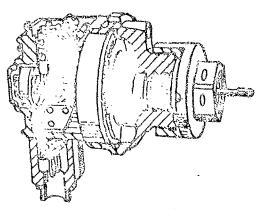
D-C type techometer generator for speed measurement, with mechanical coupling.
